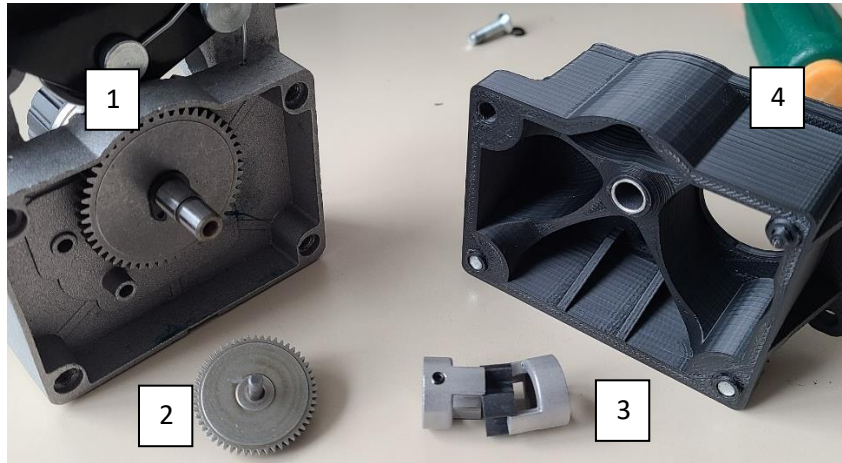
Disassembled wire-feed gearbox. 1: The main wire feeding body responsible for pinching and advancing the wire, 2: An original gear to which the spider bushing is welded, 3: Spider bushings that account for any misalignment between the gear and the shaft, 4: 3D-printed housing which the stepper motor attaches to.
